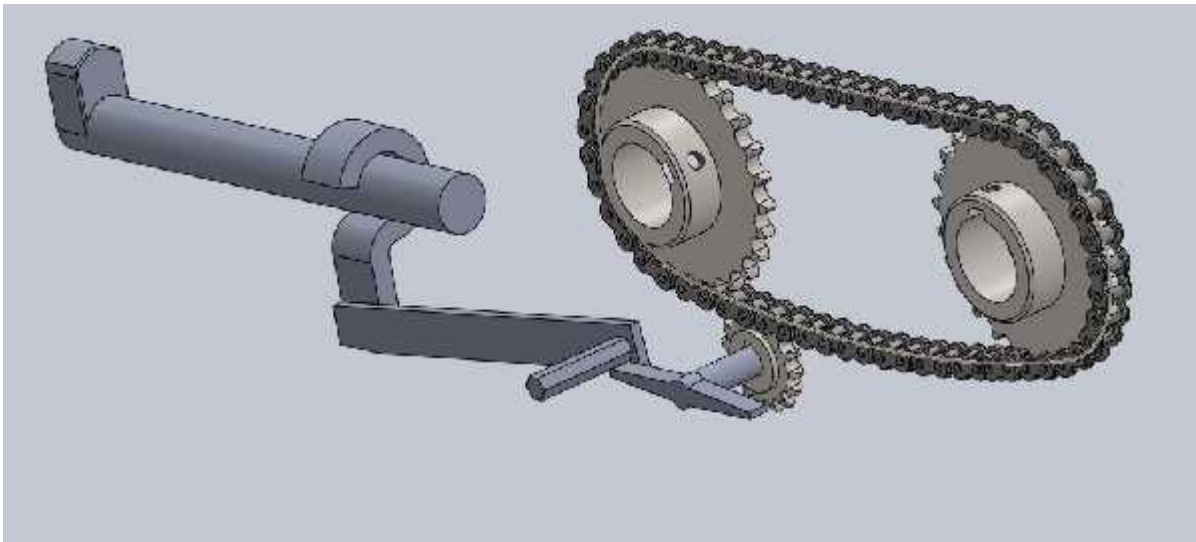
3 Overall assembly of the sprocket stand retriever system
